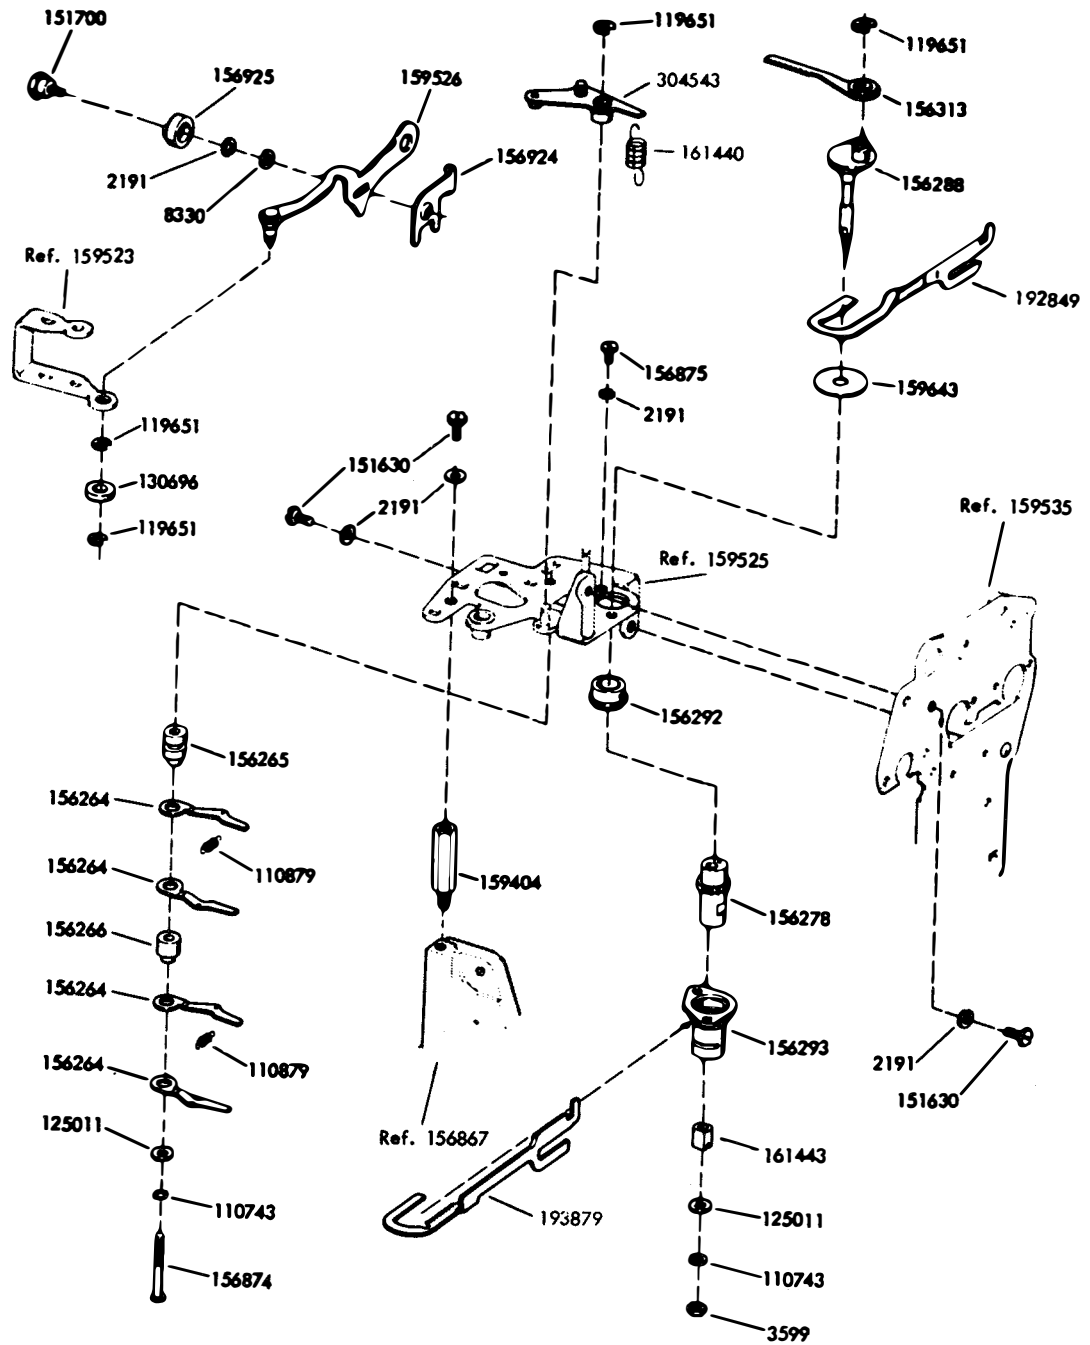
Axial Positioning Mechanism (Sheet 2 of 2)
